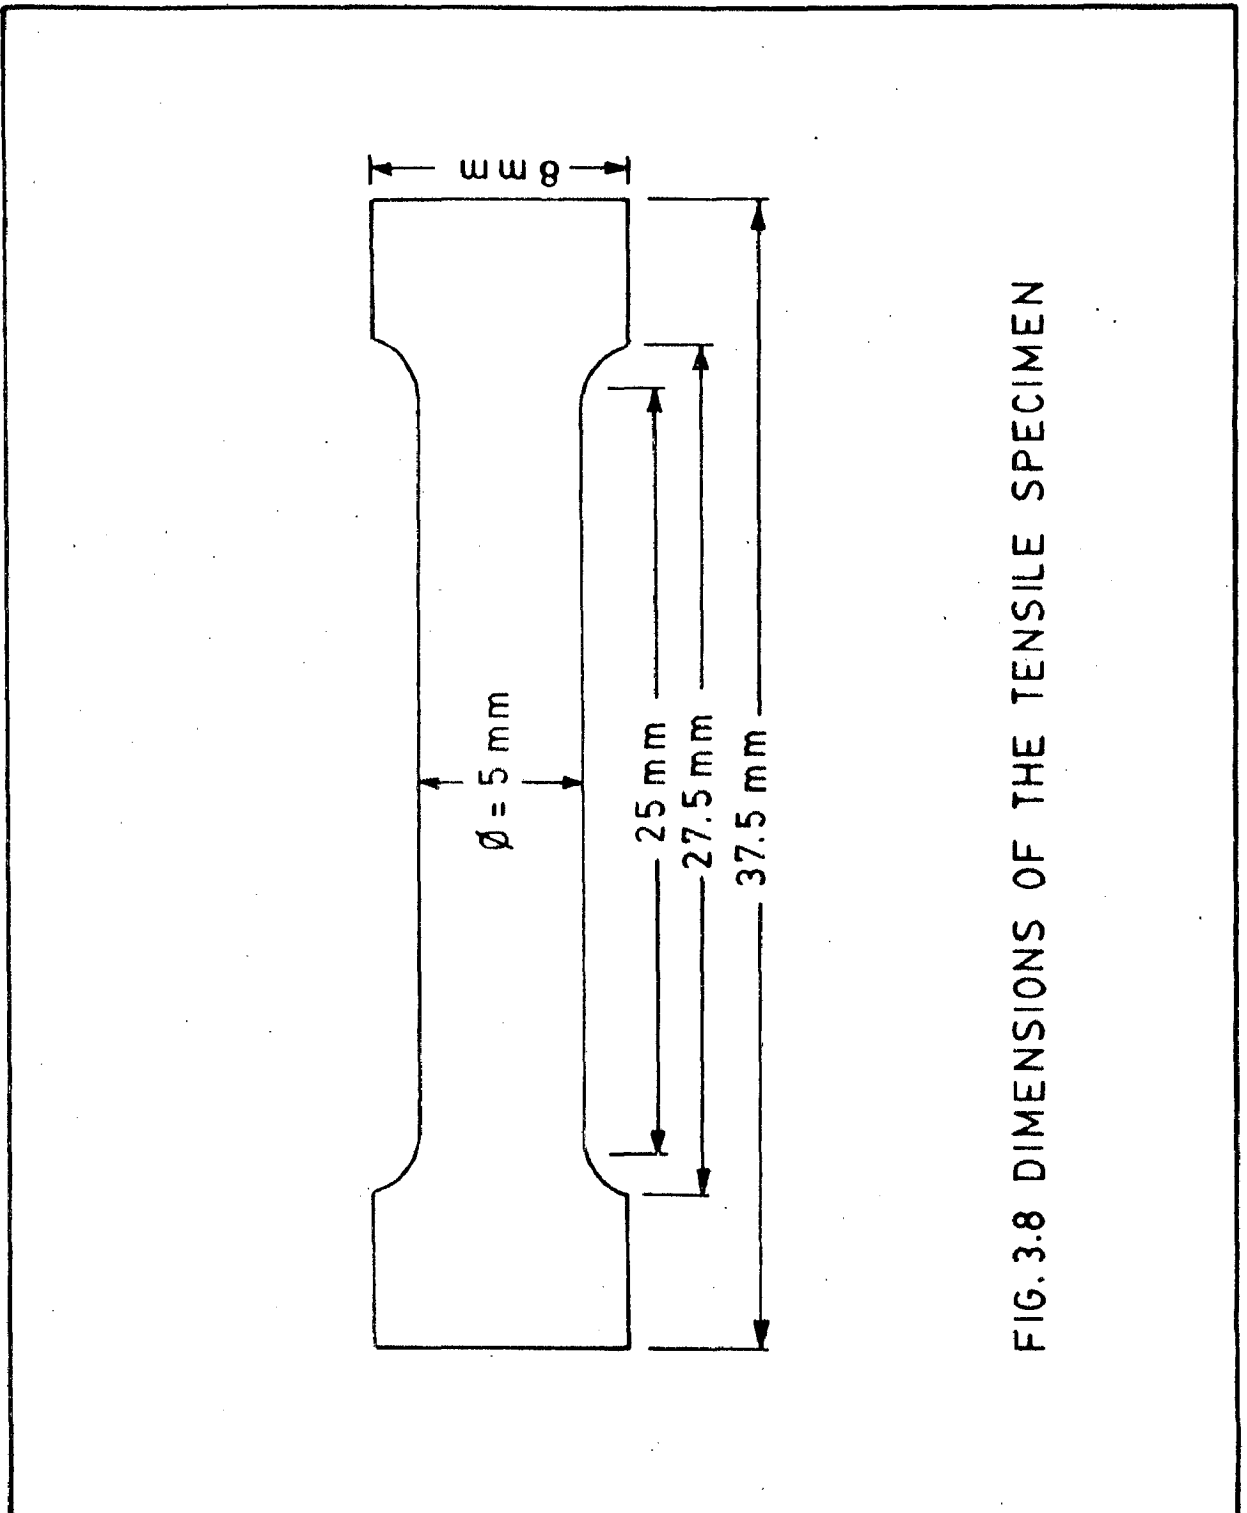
DIMENSIONS OF THE TENSILE SPECIMEN
